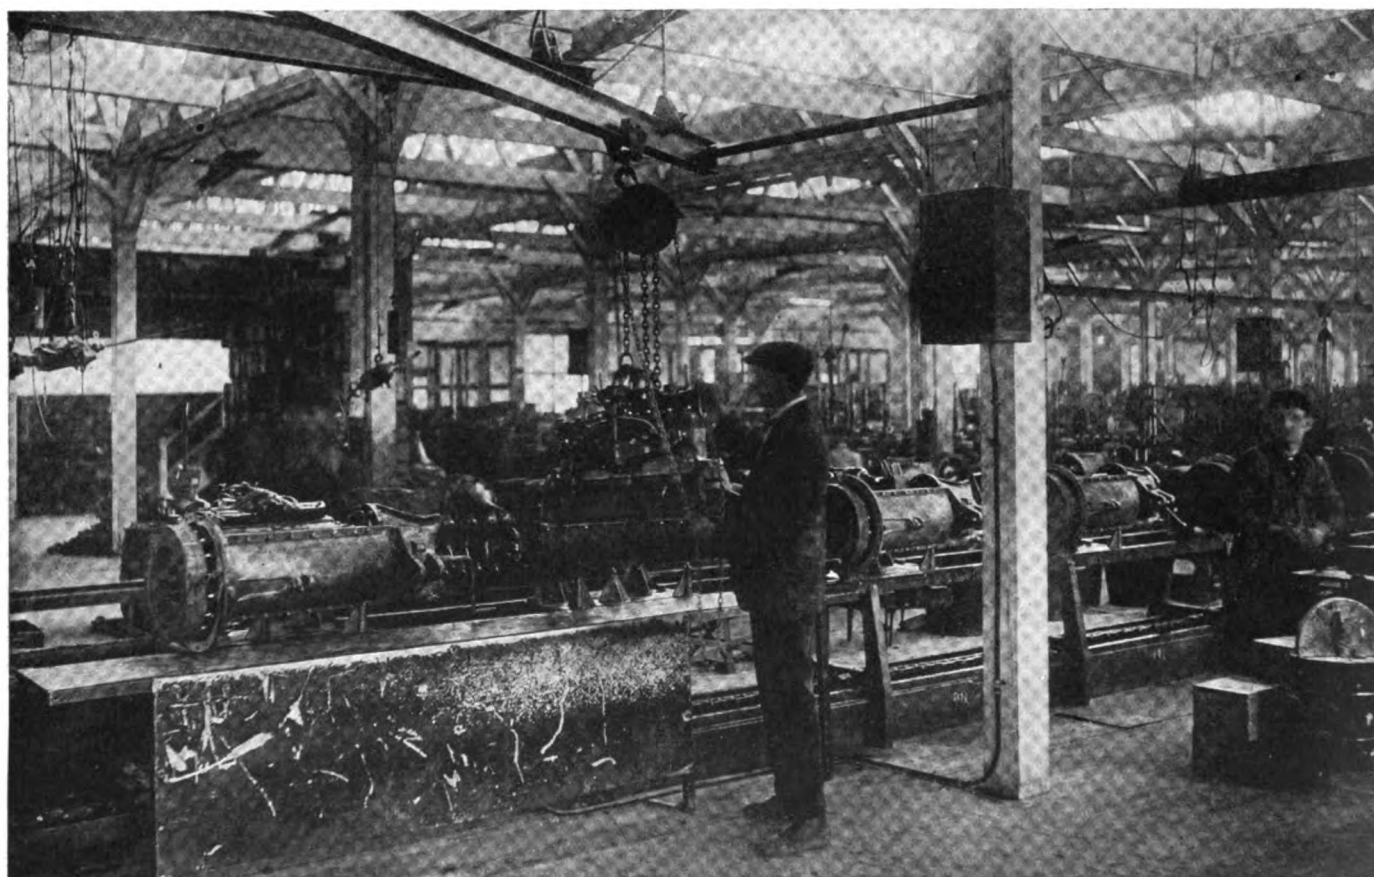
Finished engine coming off end of engine assembly chain to be carried on overhead track to tractor assembly
